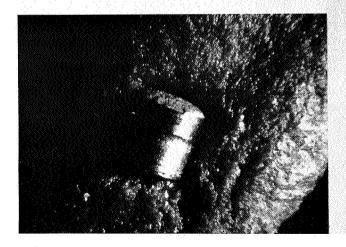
Photomacrograph showing indented area produced by impact reversals and misfit of shaft in bushing. 10x
